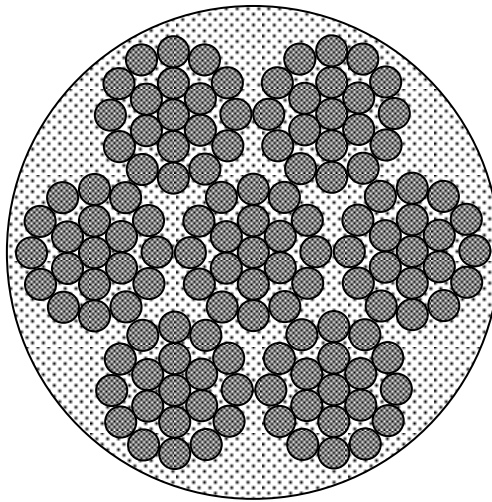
Stranded 7x19 construction class cable cross-section.
